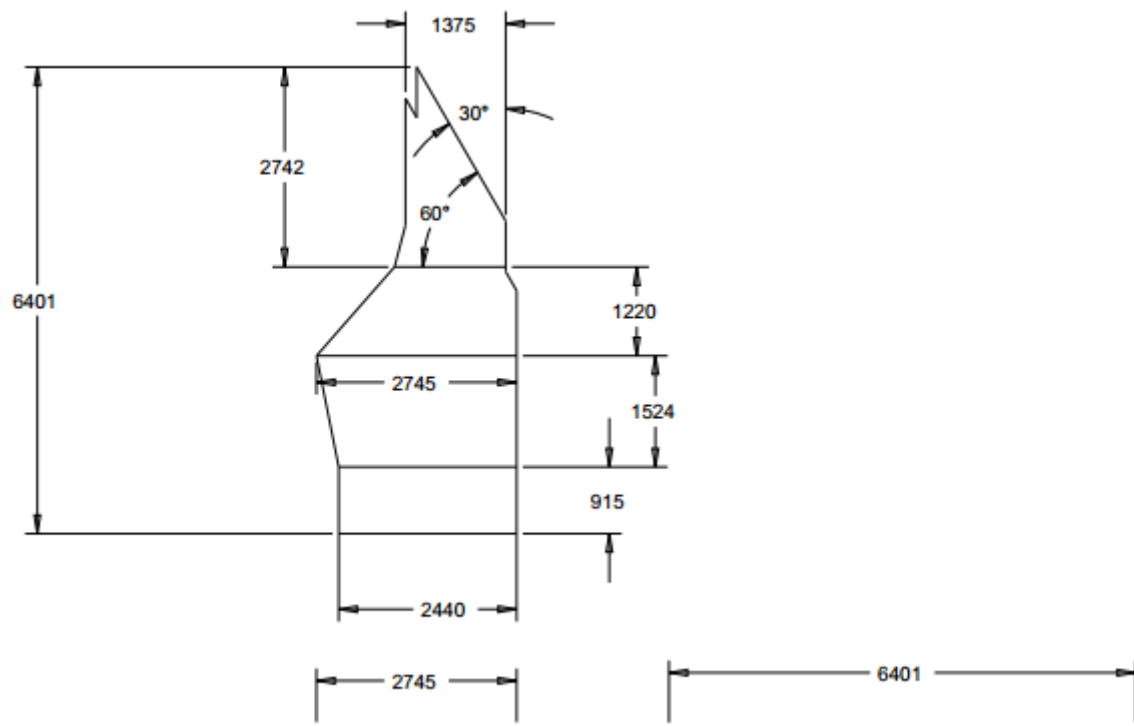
Dimensioned CAD drawing of flat plate section in third angle projection [mm]
